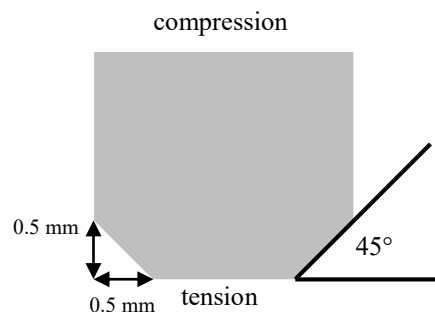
Cross section of a with 45° chamfered sample, showing the referred tensile and compressive surface
